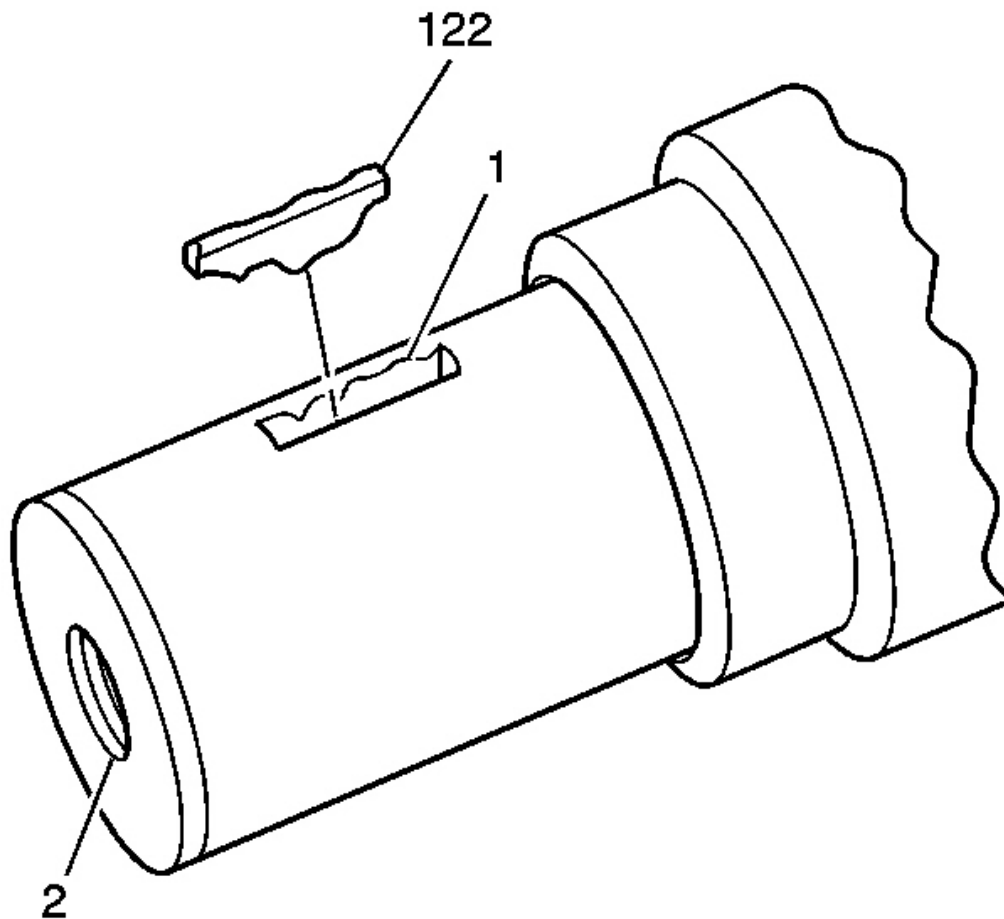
View Of Crankshaft Key, Keyway & Threaded Hole
